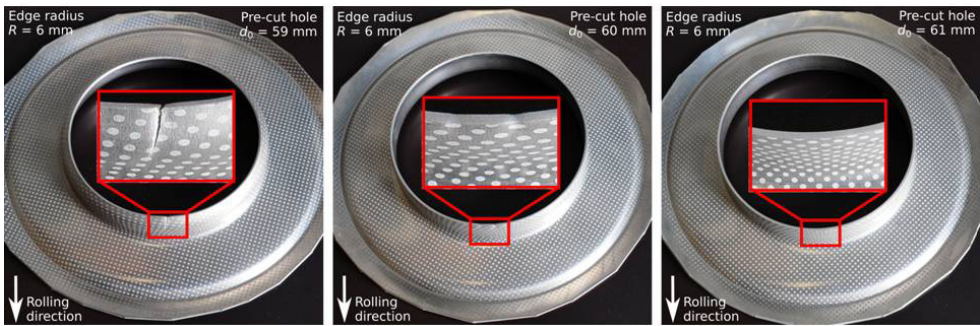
Flanges from pre cut hole diameters of 59 (fractured), 60 (necked) and 61 mm (successful) with a 6 mm edge radius
